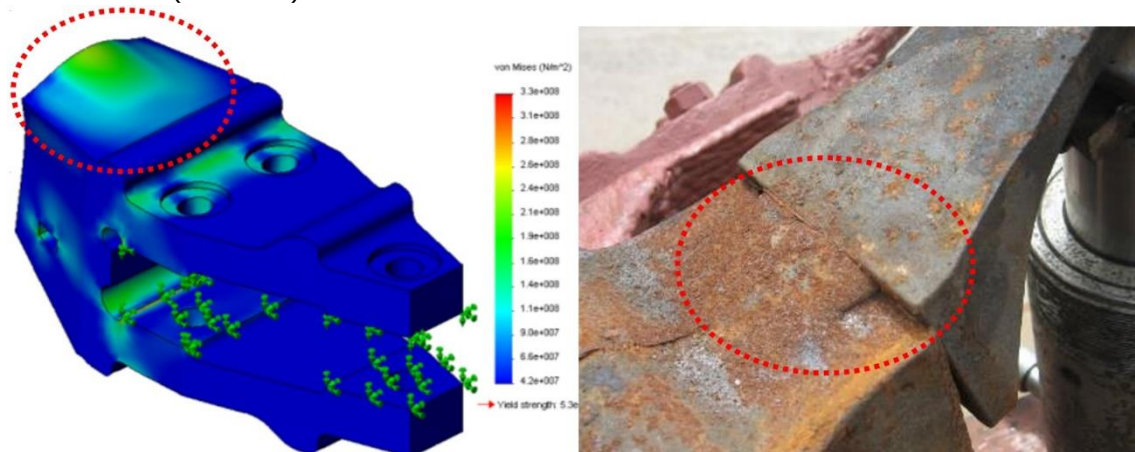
Stress distribution in the modular tooth holder, and the fractured physical prototype.
